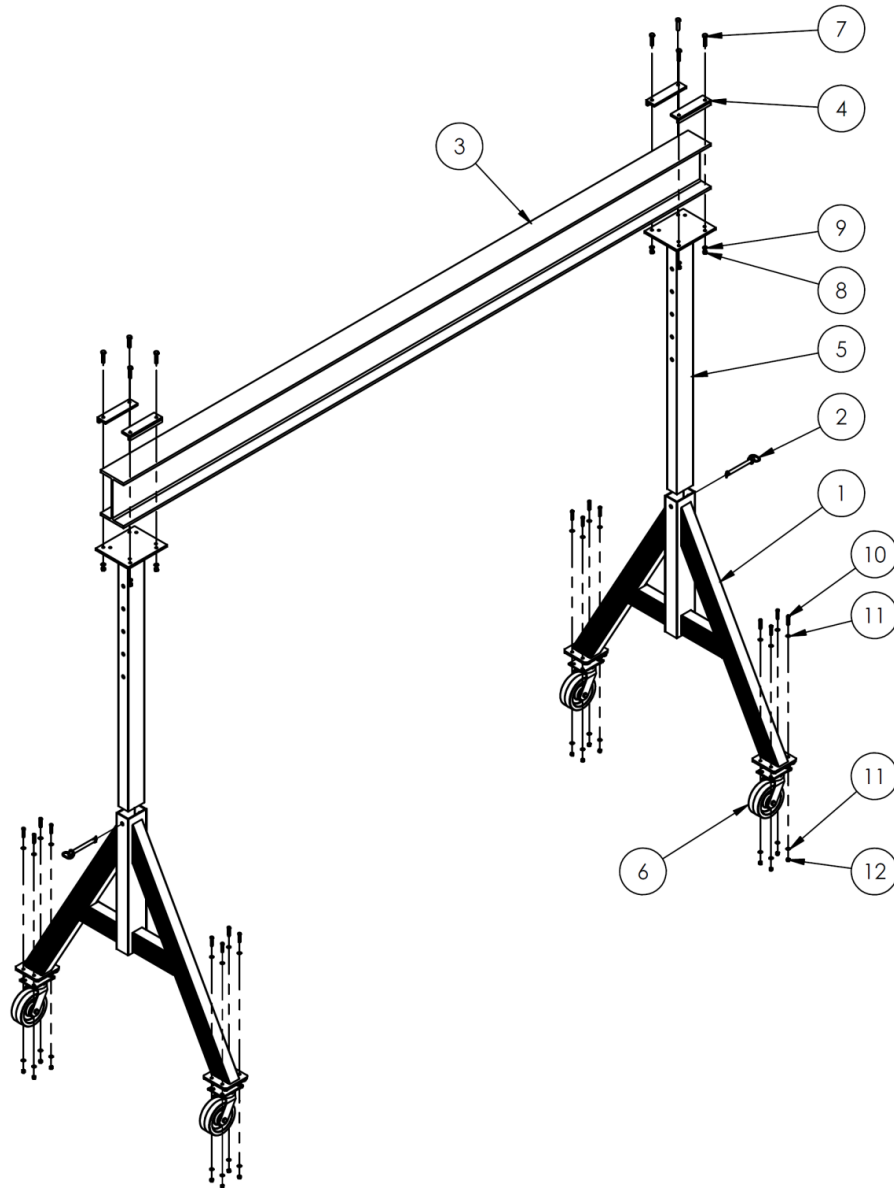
Exploded view of models AHA-6-10-8, AHA-6-10-10, & AHA-6-10-12
